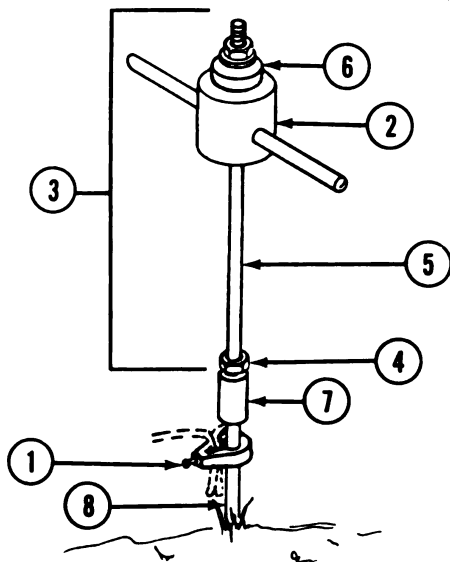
Slide Hammer Assembly (Removing Ground Rod)
